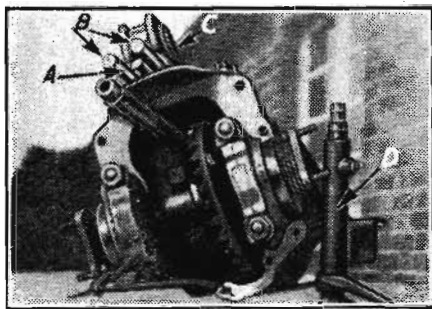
(A) Gear-locking "Tee" rod. (B) Gear selector rods. (C) Front engine mounting. (D) Gear control pillar displaced.
